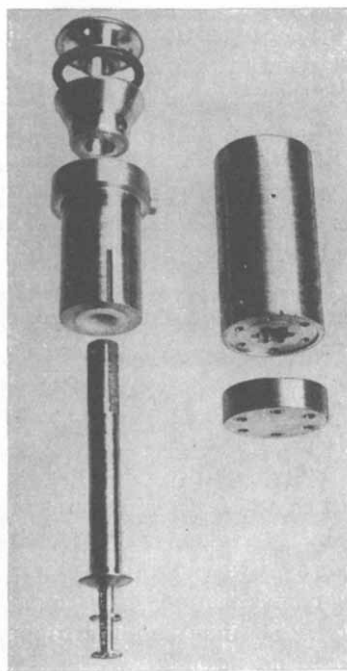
Exploded view of the homogenizer. Stopper assembly left, bottom to top: Shaft with blades, stopper showing nylon bushing and air exhaust groove, lower half of drive wheel, "O" ring, upper half of drive wheel. Chamber assembly right, bottom to top: bottom plate, chamber showing fluted portion and air exhaust hole.
